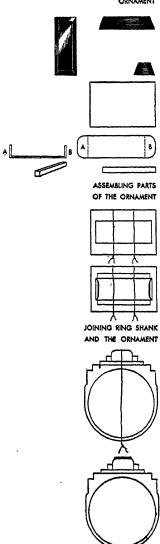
Shaped and pierced metal shank with oblong stone, metal plate, and wire units
